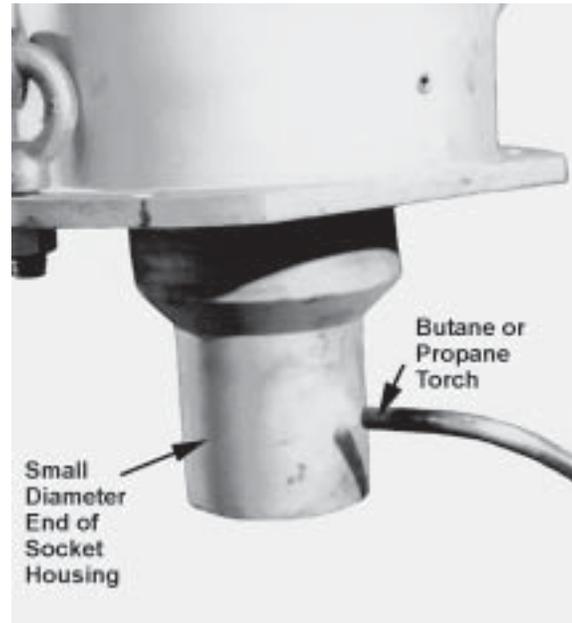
Heating Housing to Remove Roller Bearing from Small Diameter End
